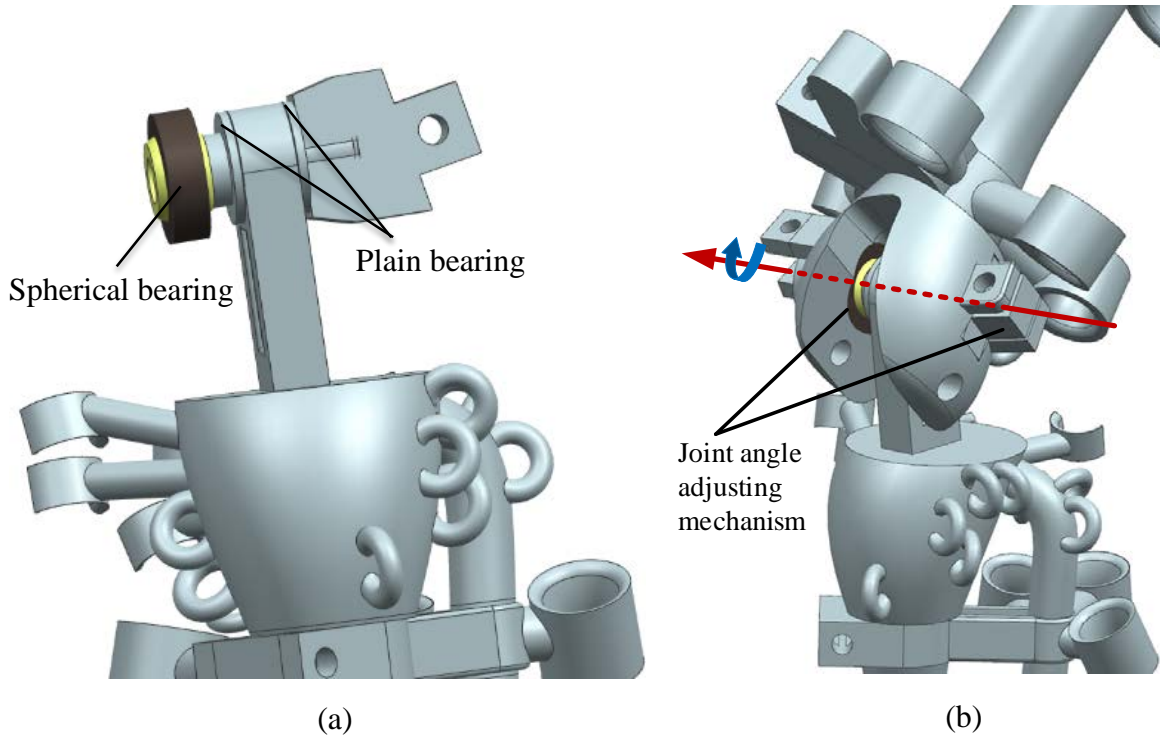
Configuration of the robotic left knee. (a) Plain and spherical bearing in knee joint. (b) Joint angle adjusting mechanism.
